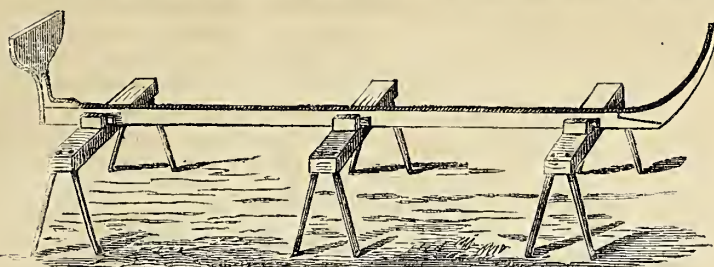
LAYING THE KEEL AND ATTACHING STEM AND STERN.
